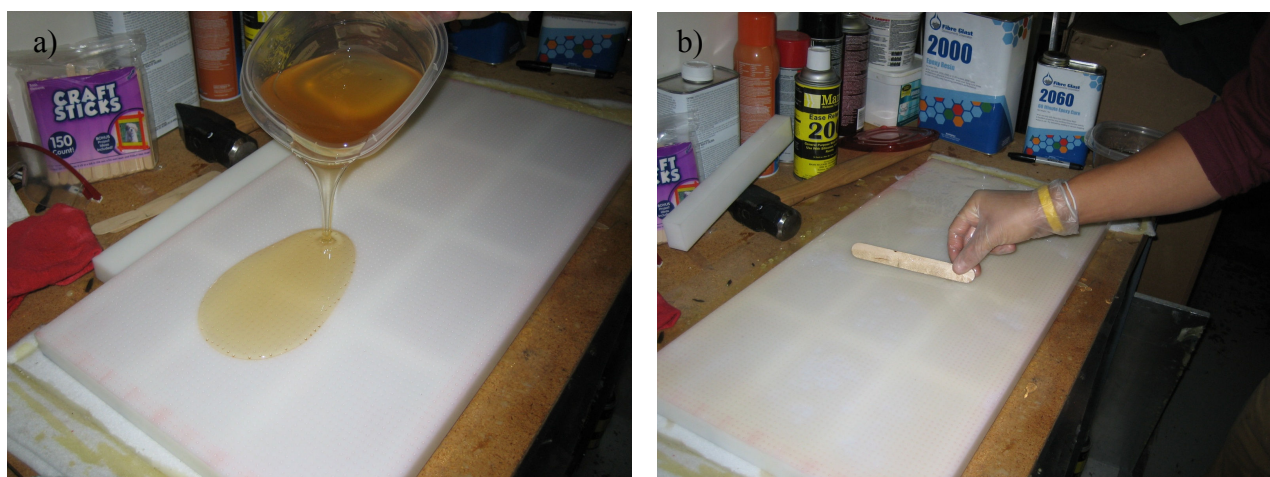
Pouring mixture (a) and spreading it over the mold (b)
